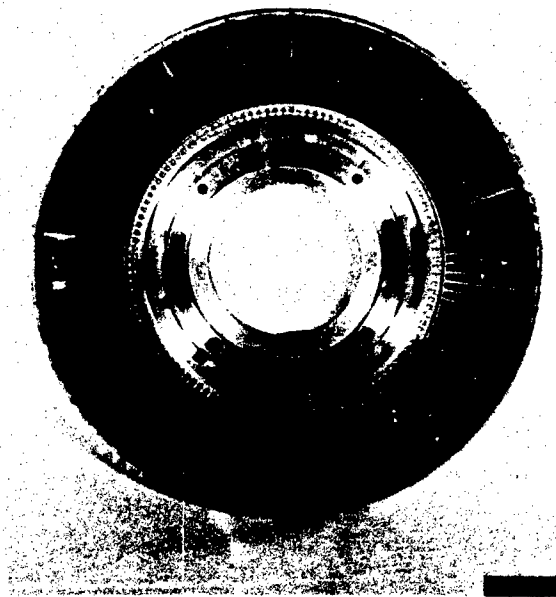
Build I, Full Front View of Second Rotor Assembly (XPN-18907)
